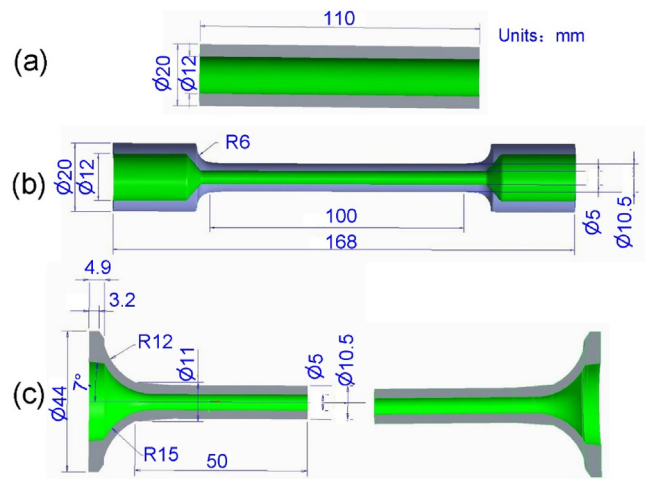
Diagram of CWR-forging for hollow valve blocking, (a) workpiece (b) CWR for rod formation (c) forging valve head.
